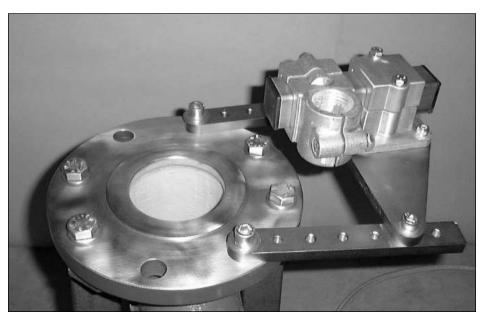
ADJUSTABLE SUPPORT MOUNTED TO BASE PLATE
